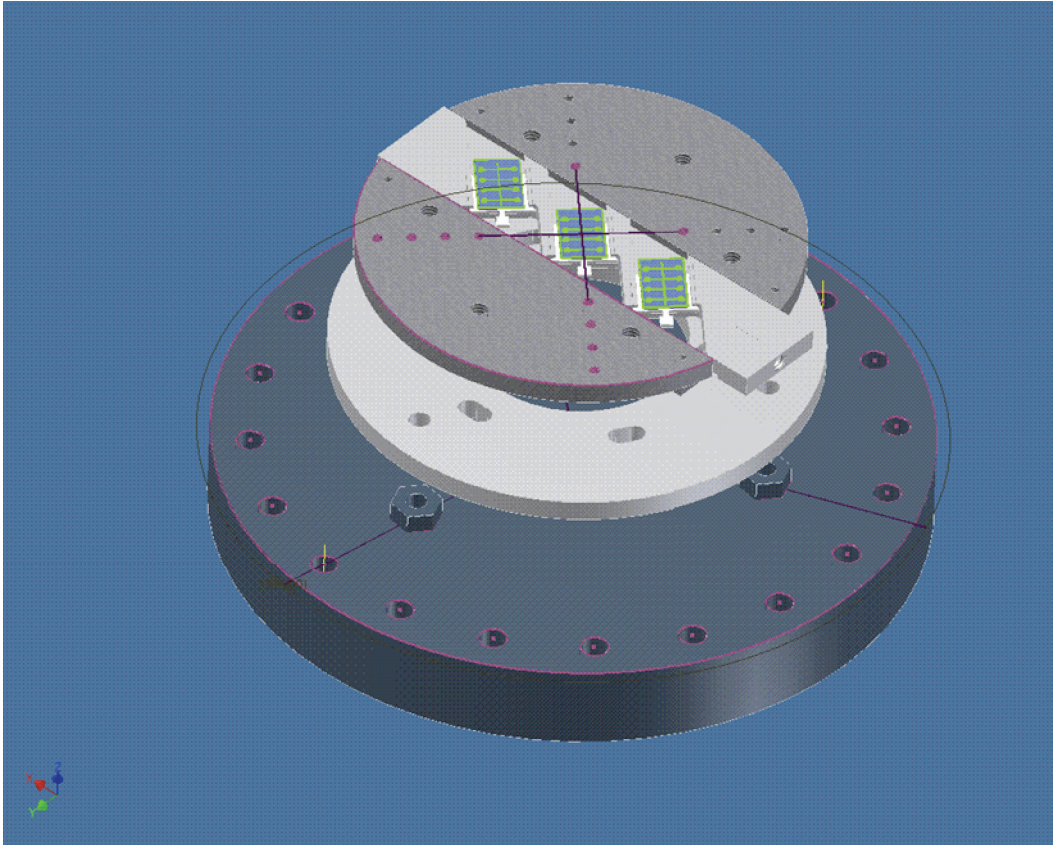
Schematic drawing of the bottom flange, bottom electrode and sled assembly. The top electrode and magnetic transfer rod are not shown. Each chip is 13 mm x 20 mm.
